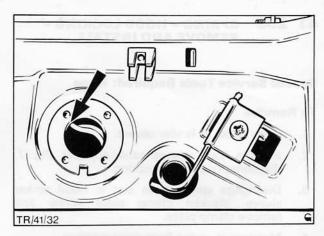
Hood release spring adjustment: spring edge (arrowed) in contact with front face of sleeve
